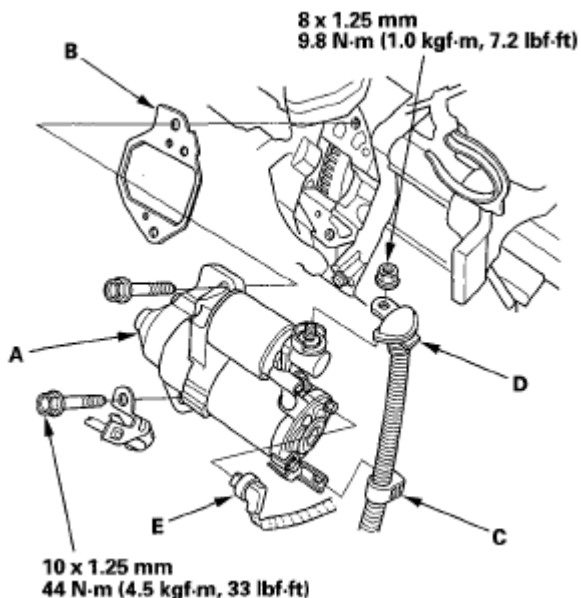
Identifying Starter Mounting And Wiring With Torque Specifications
